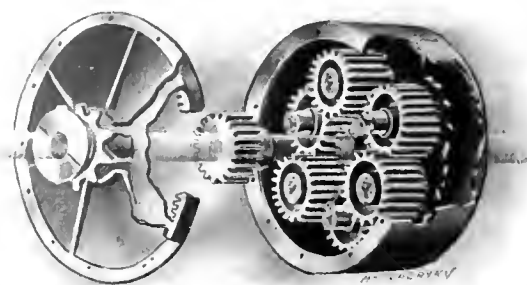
Planetary Transmission used on the Single-cylinder Engine.
